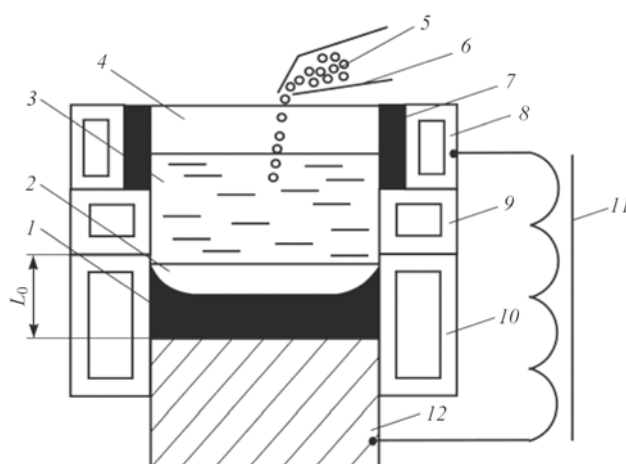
Schematic of ESS of end faces with discrete filler in CSM: 1 — deposited metal; 2 — metal pool; 3 — slag pool; 4 — mould; 5 — filler metal feed mechanism; 6 — discrete filler material; 7 — protective layer (molybdenum, tungsten and graphite); 8–10 — mould sections; 11 — transformer; 12 — billet
